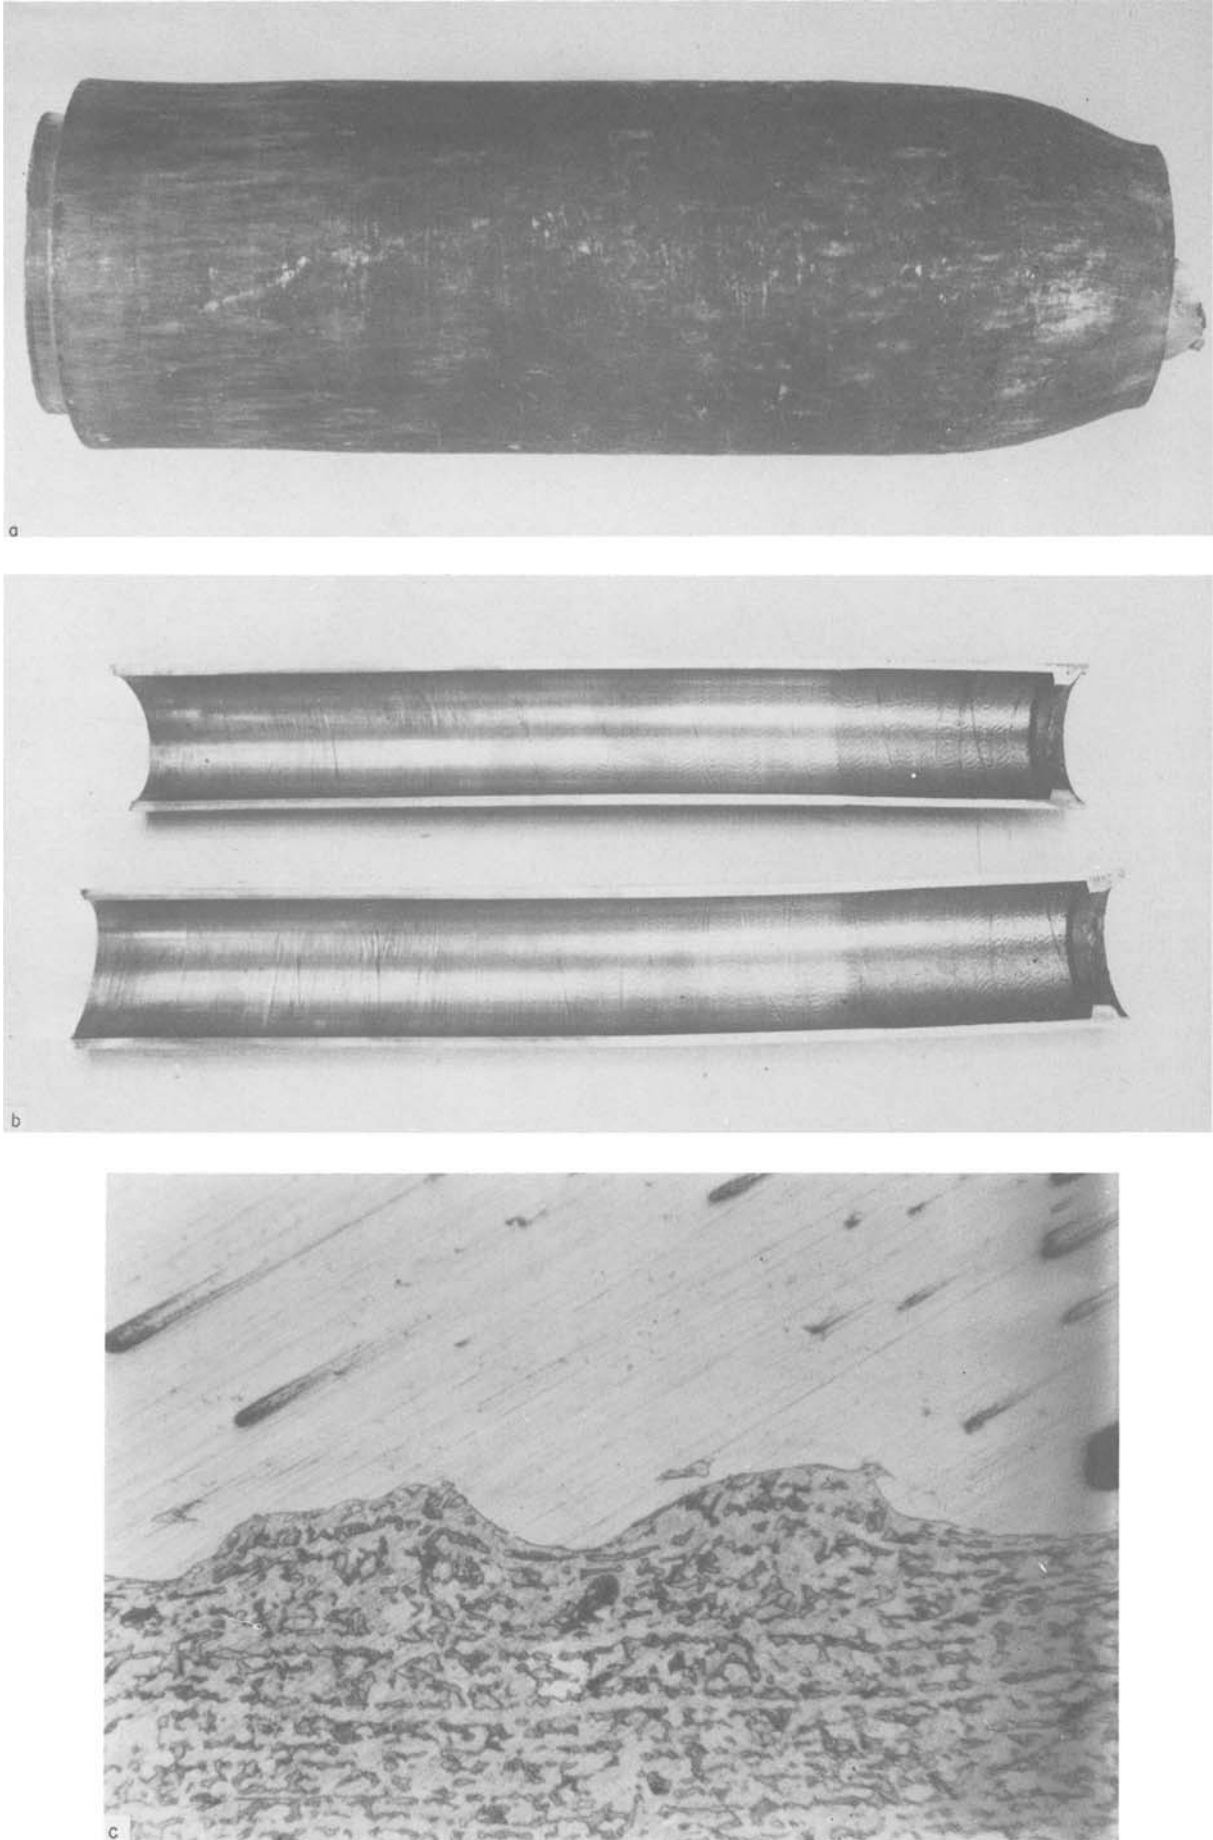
(a) Implosively welded bi-metallic tube prior to drawing. (b) Sectioned, drawn, tube showing differential end drawing effects. (c) Typical interfacial weld (copper-MS).
